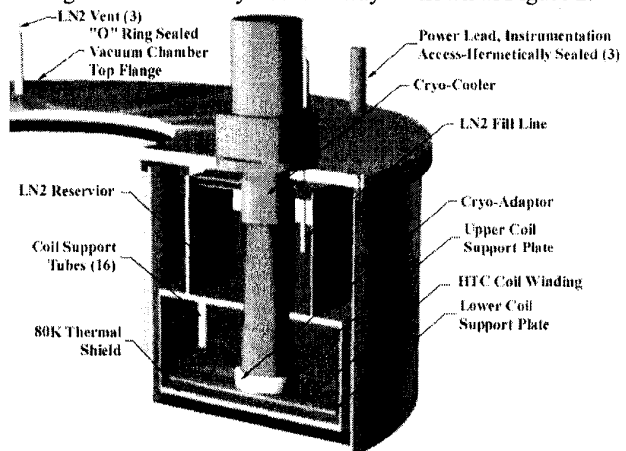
Cutaway cross-section of the L-Coil cross-section with labeled components.
